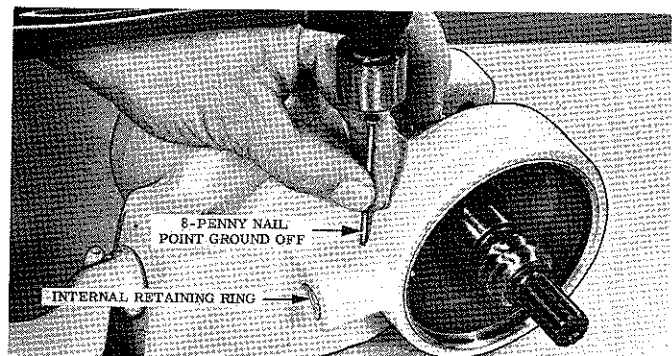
Driving Out Roll Pin Holding Load Brake Pawl
